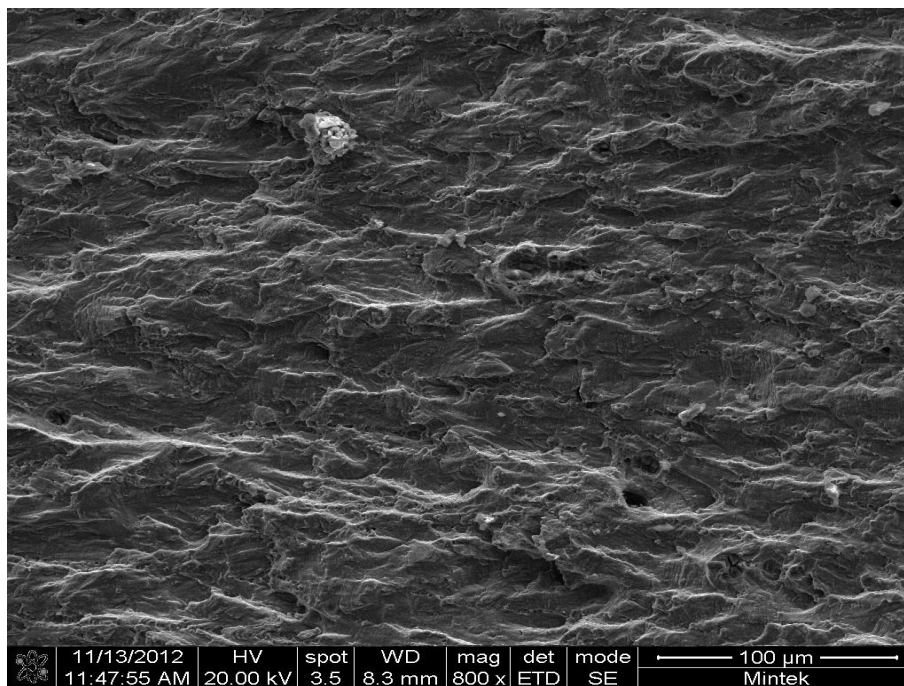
Crack initiation zone of AISI 316L sample carburised at 750°C showing brittle (tearing) fracture.
